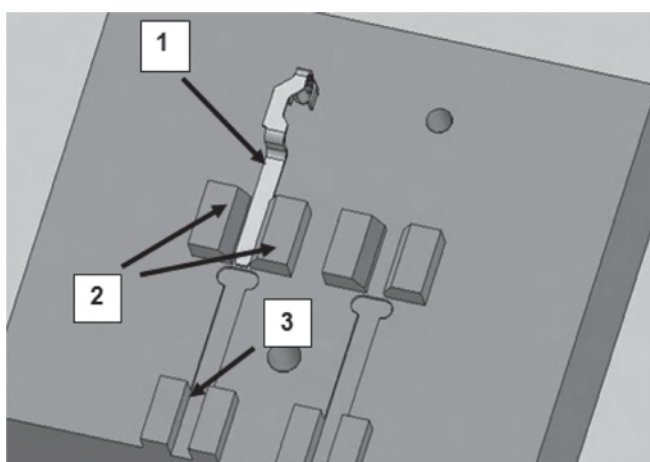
Fixture-positioning device with components: terminal (1), lateral support (2), wire positioning (3)
